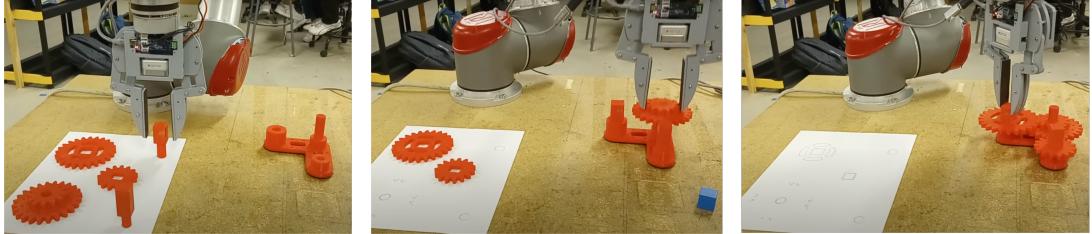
Demonstration of accuracy and precision by reliably assembling the “Siemens gear assembly problem” [57] with sub-millimeter accuracy requirements.
